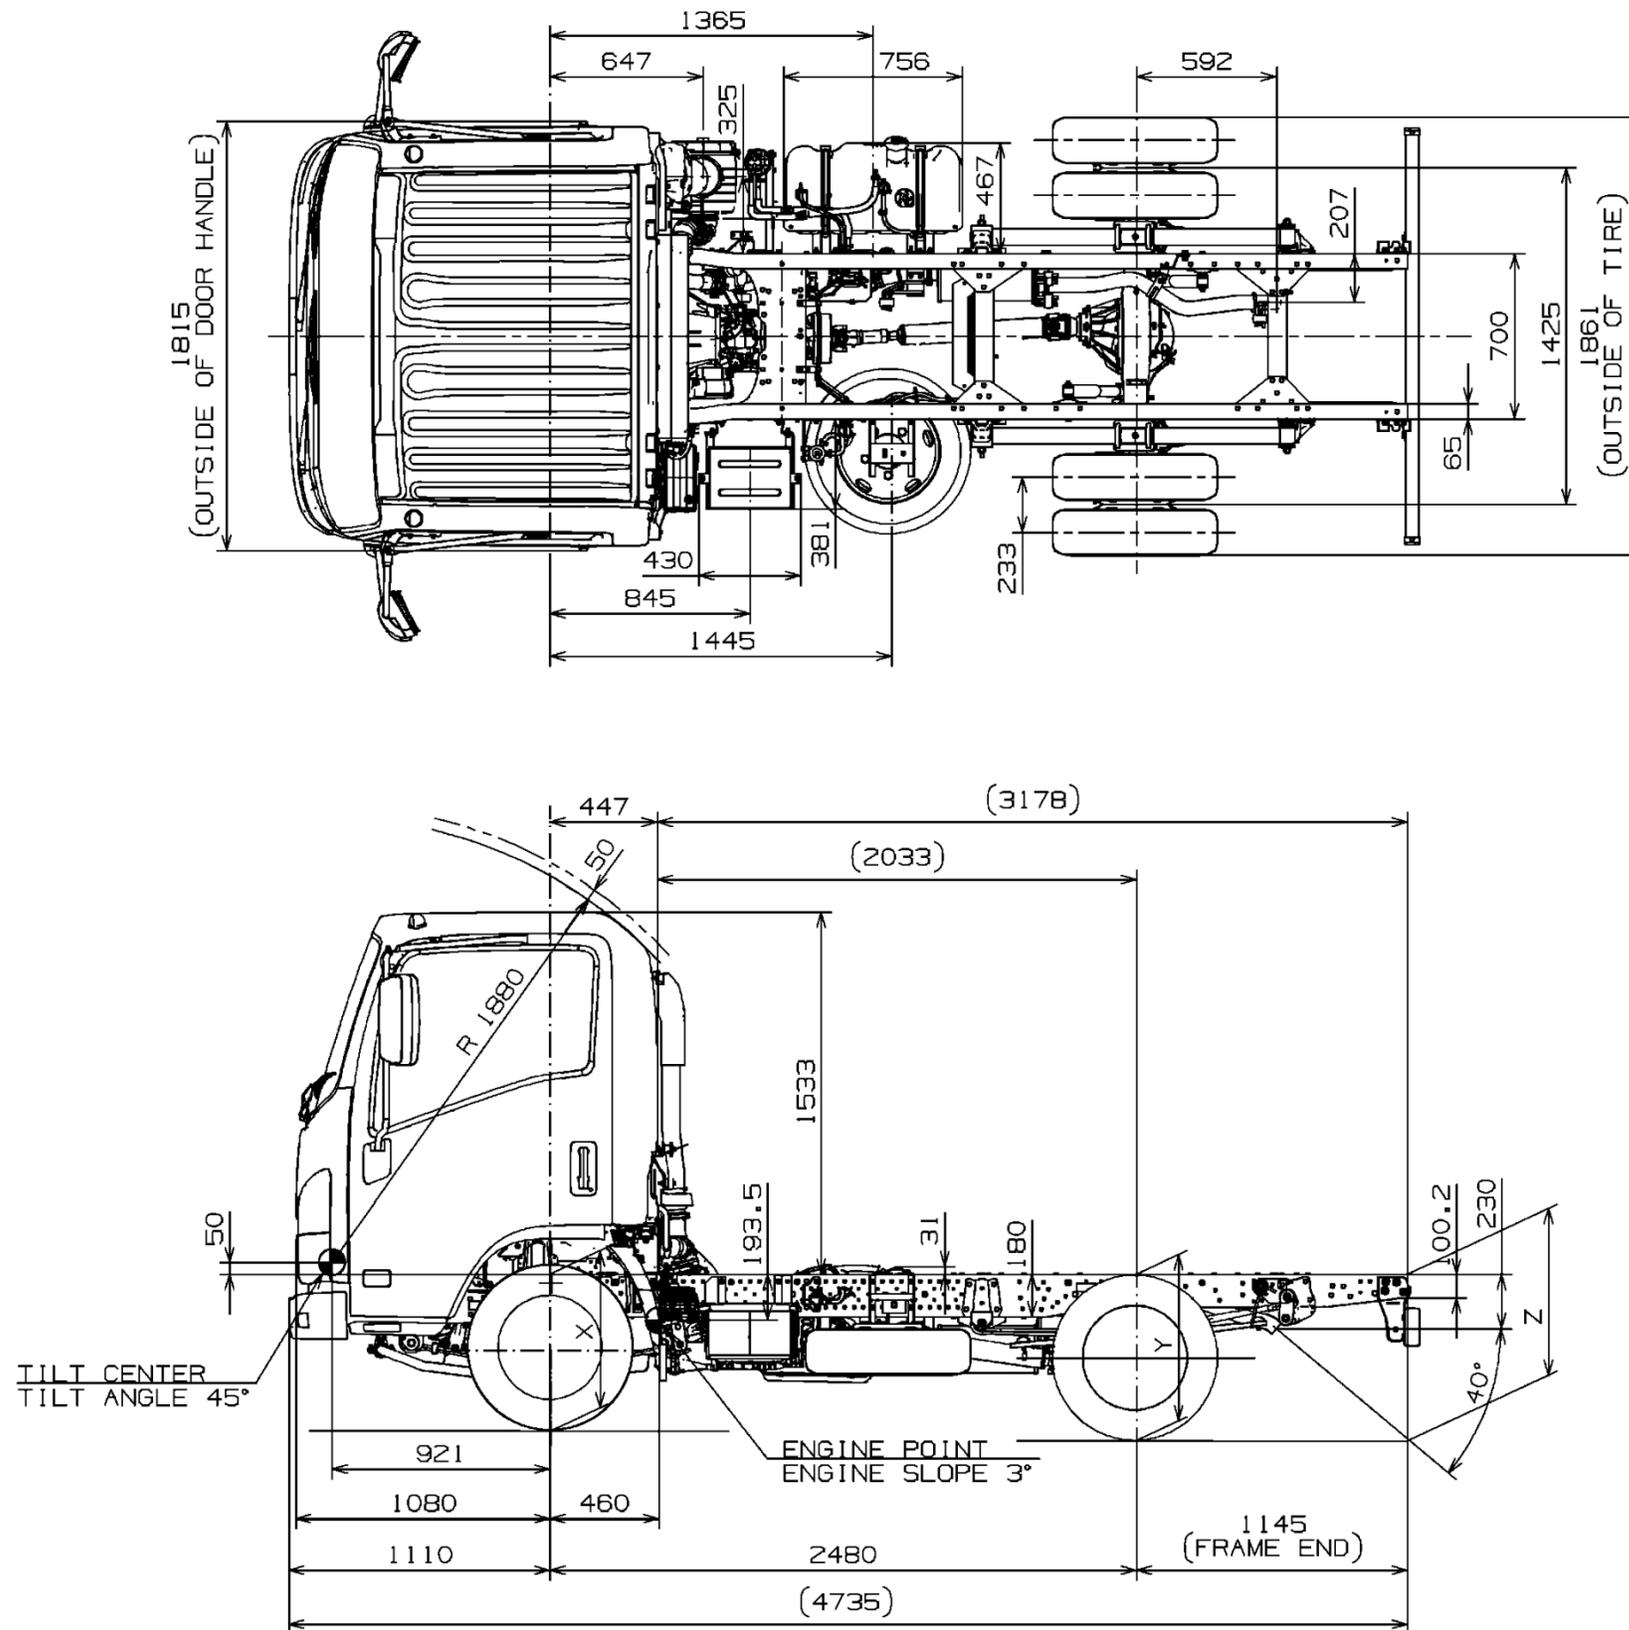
Cab Chassis Drawing NMR85L/U-HH5AYEN
